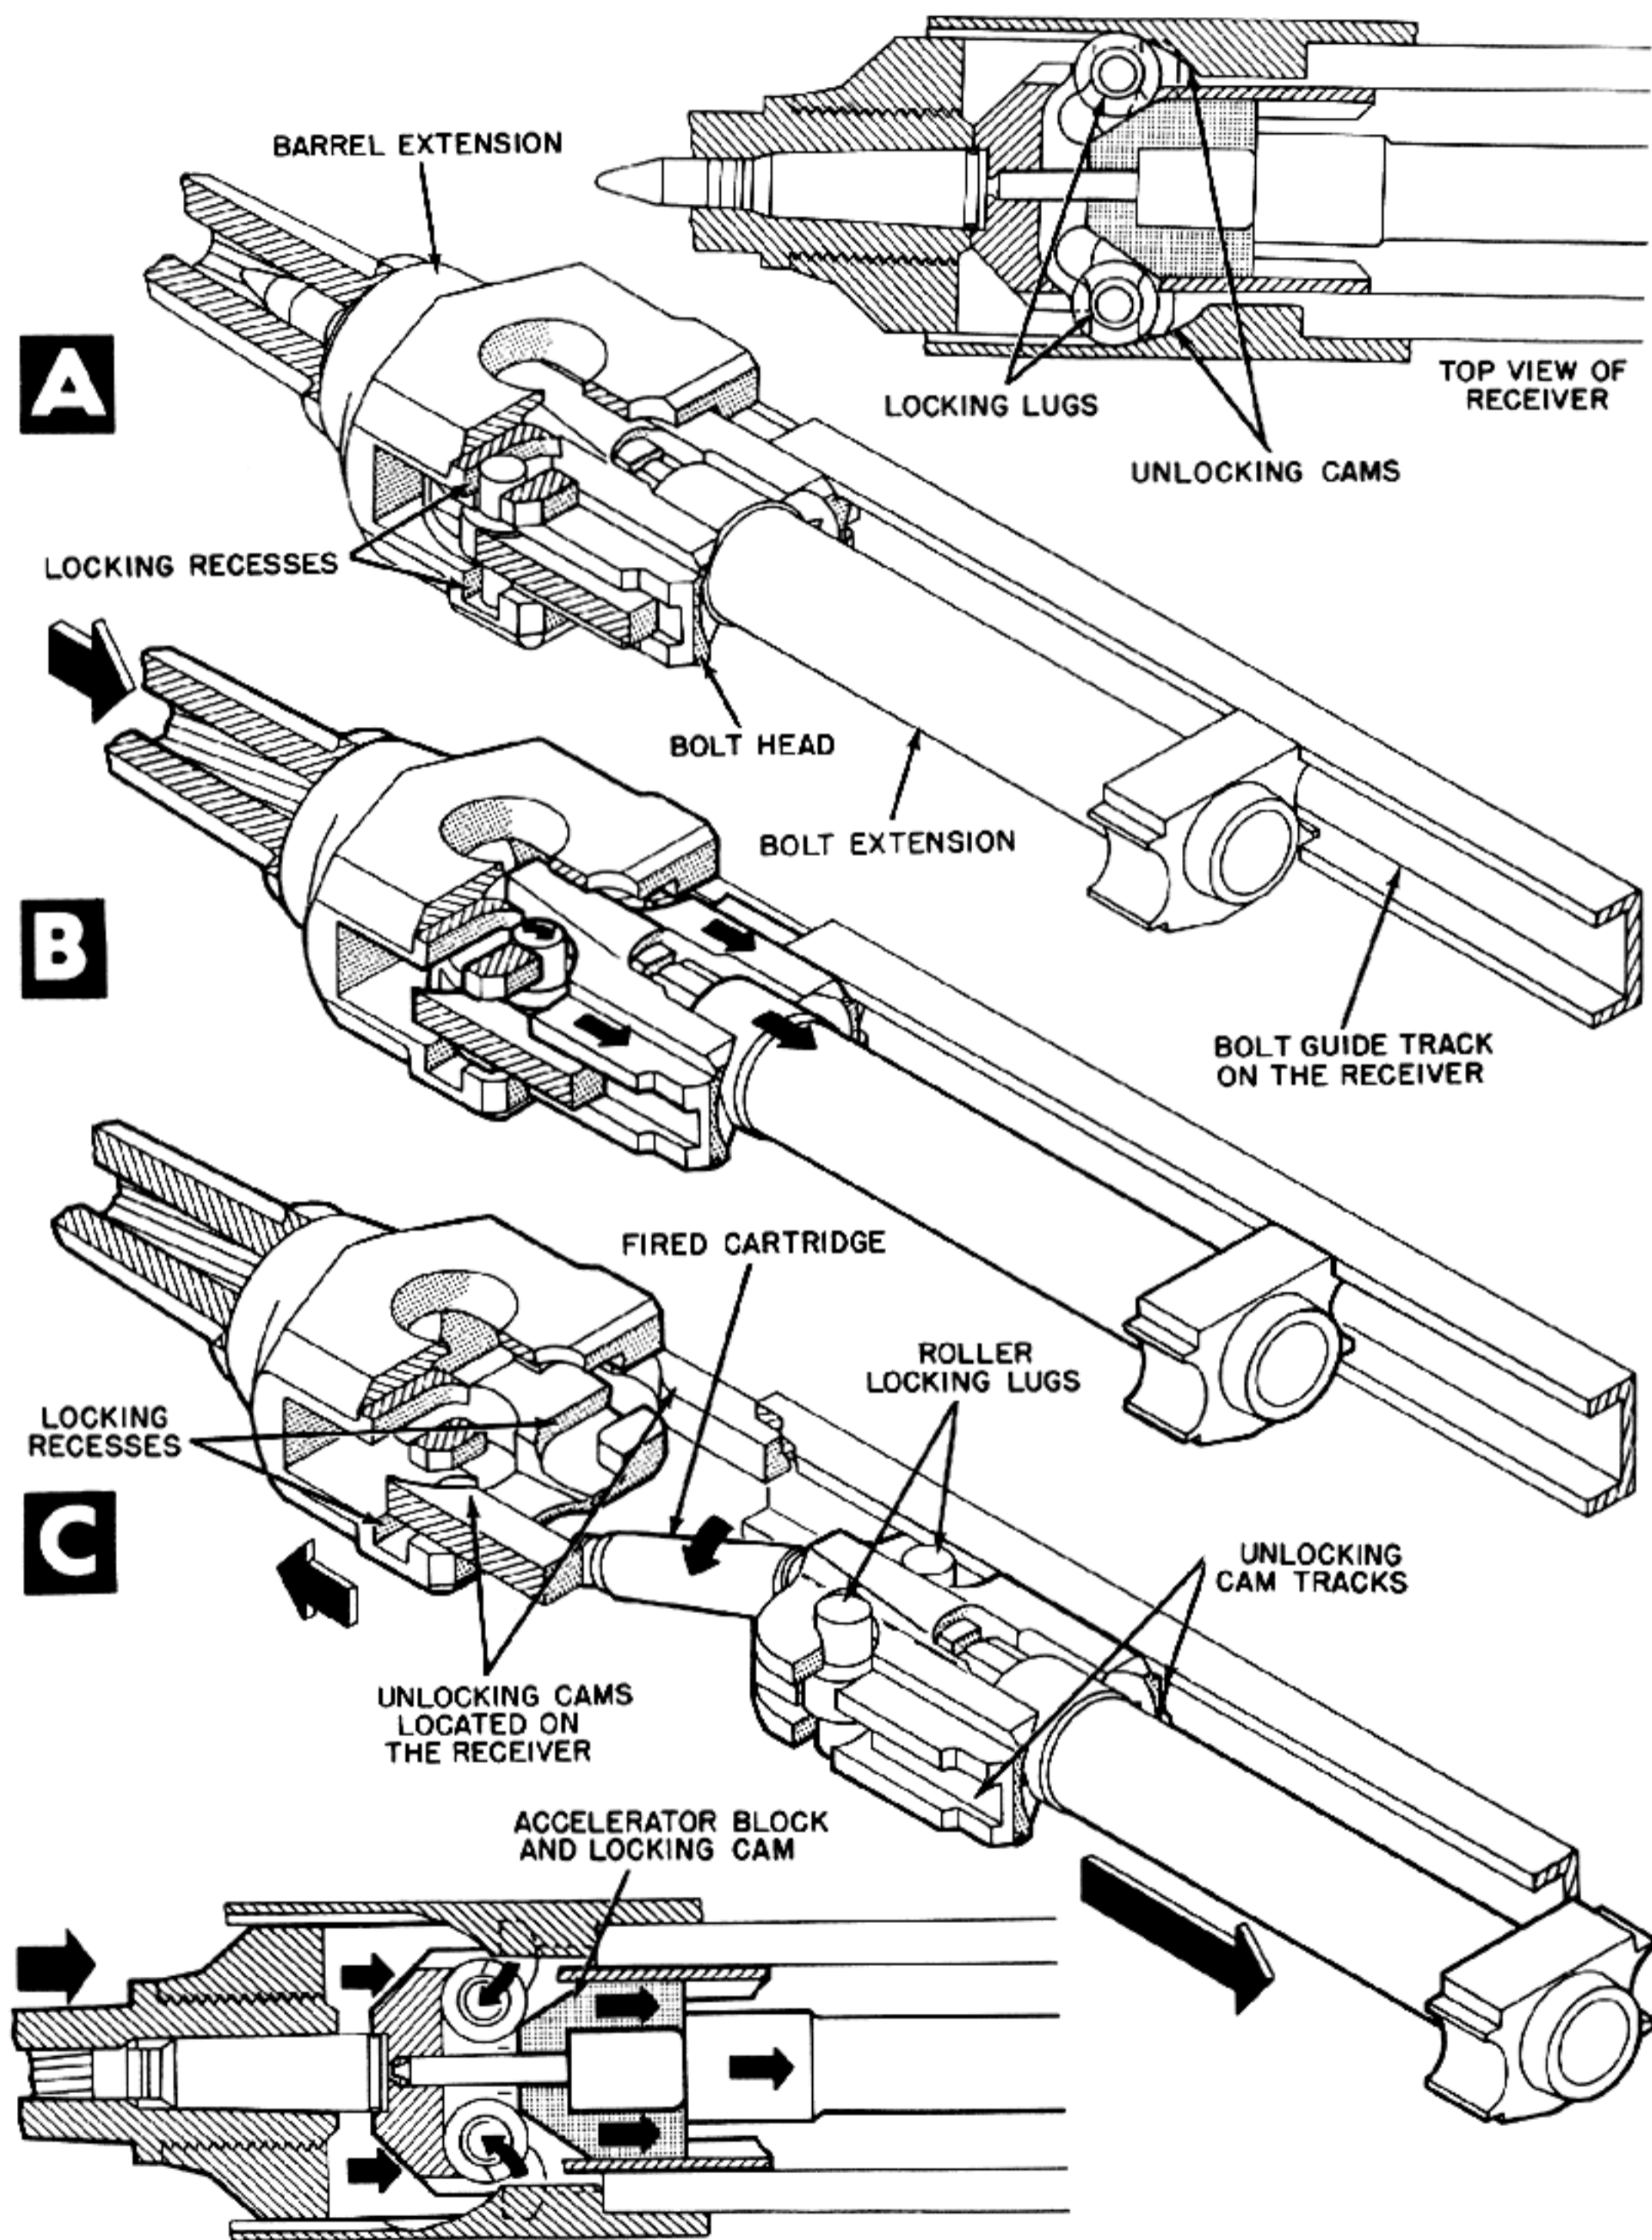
Locking Rollers Are Cammed Free of Barrel Extension by Rails in Receiver.
